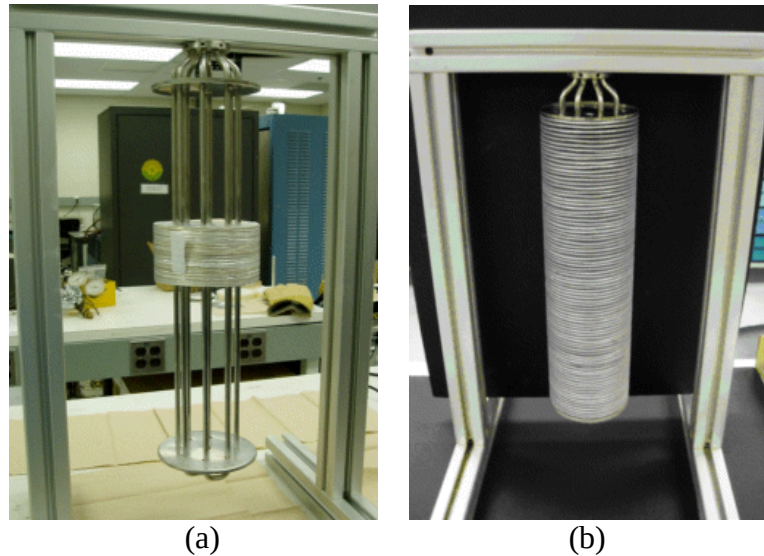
(a) Prototype 2 heat exchanger assembly with consolidated fin stack; (b) assembly with distributed fins.
